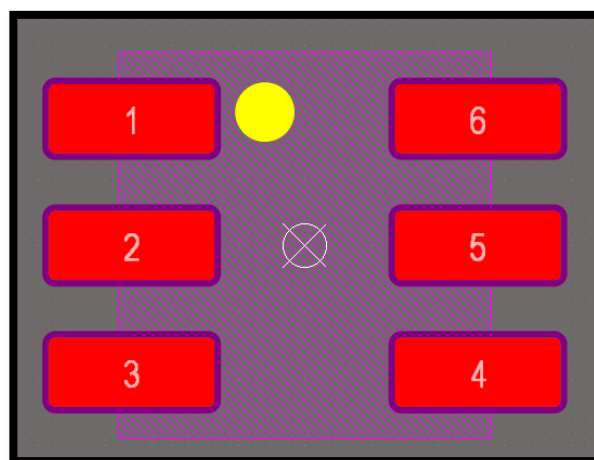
The PCB Footprint for the LTC6993HS6-1#TRMPBF
